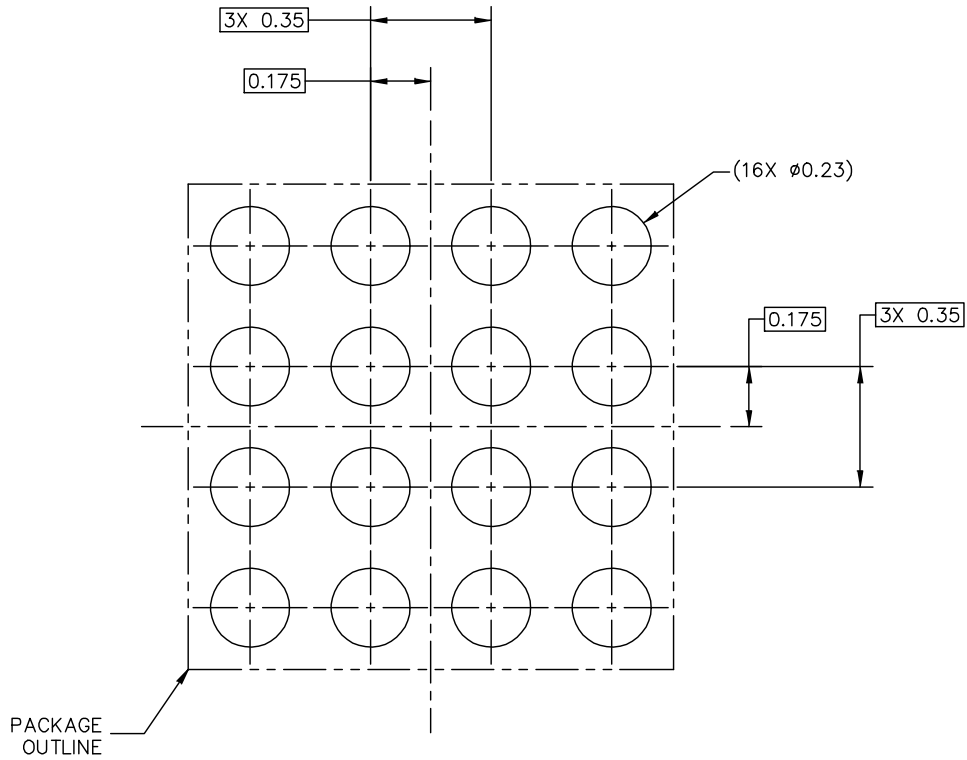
Reflow soldering footprint part2 for WLCSP16 (SOT2127-1)
